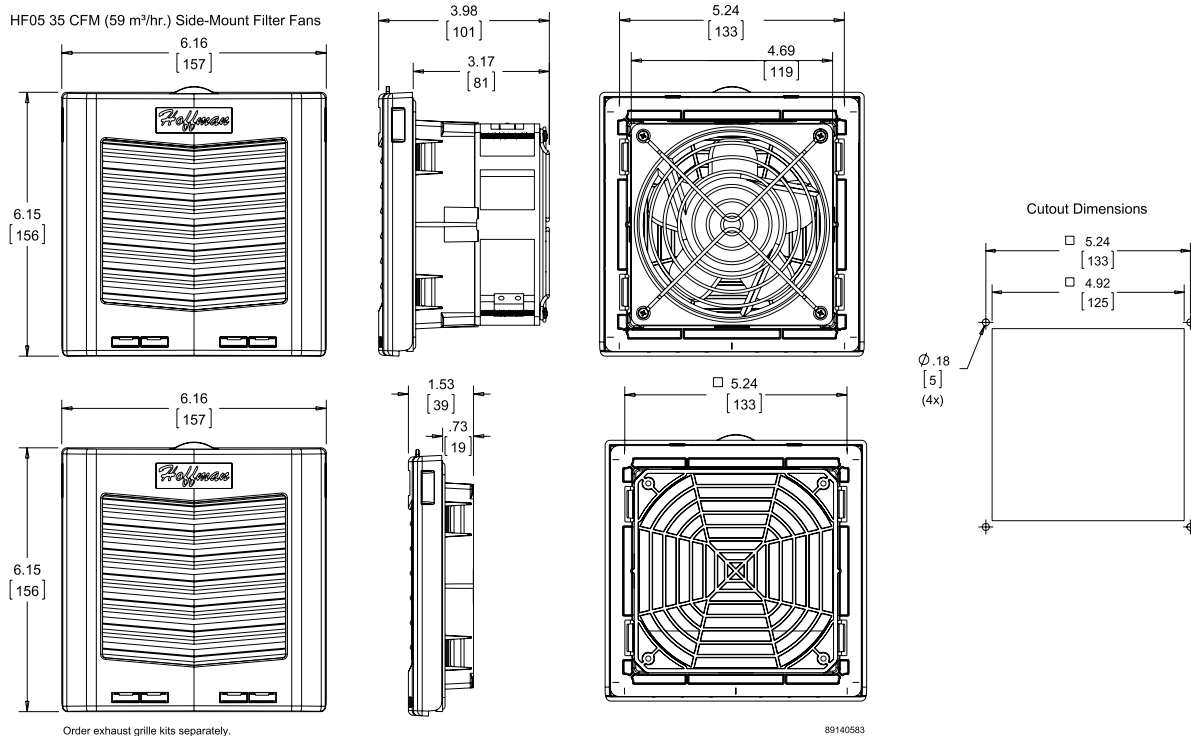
Dimensions of a HF05 exhaust fan and exhaust vent and cutout dimensions. The gland plate should be removed, and the fan and vent cutouts made in the gland plate. These cutouts must be aligned with the openings already provided in the enclosure for the T20 air conditioner. Mount the fan and vent to the gland plate then reattach the gland plate to the enclosure.
